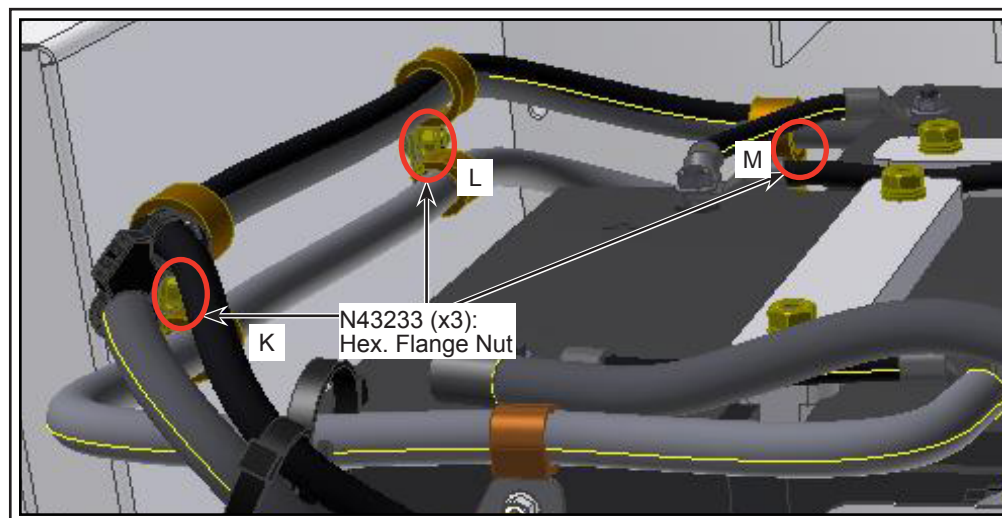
Removal of Hex. Flange Nuts (3x N43233)
